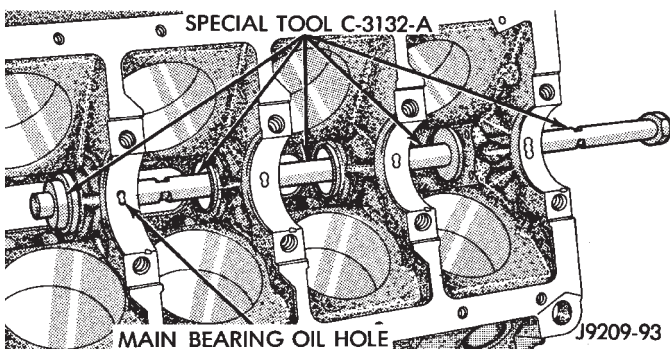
Camshaft Bearings Removal/Installation with Tool C-3132-A
